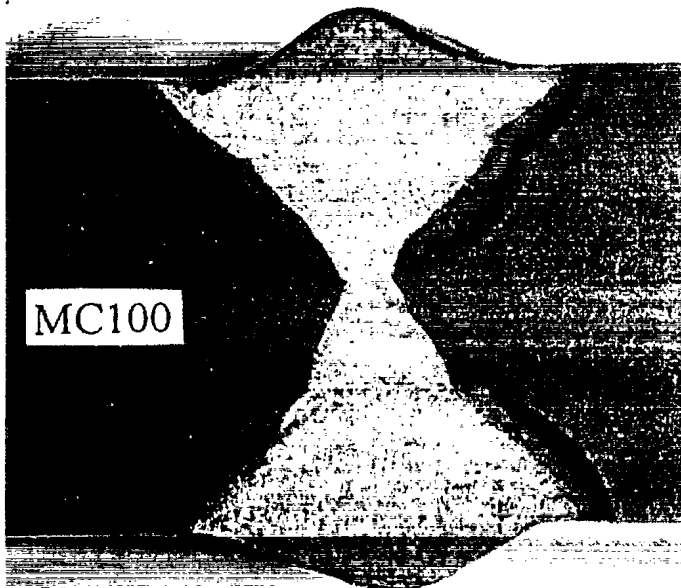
Photomicrograph of Cross-Section of the Weld Made Using the MC-100 Metal Cored Wire and M2 Gas
